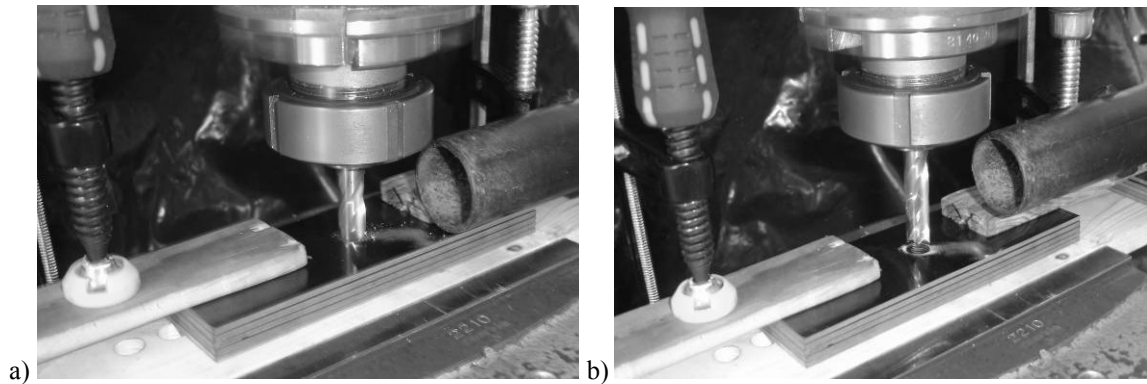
Specimens during the hole drilling operation (a) and after drilling (b).
